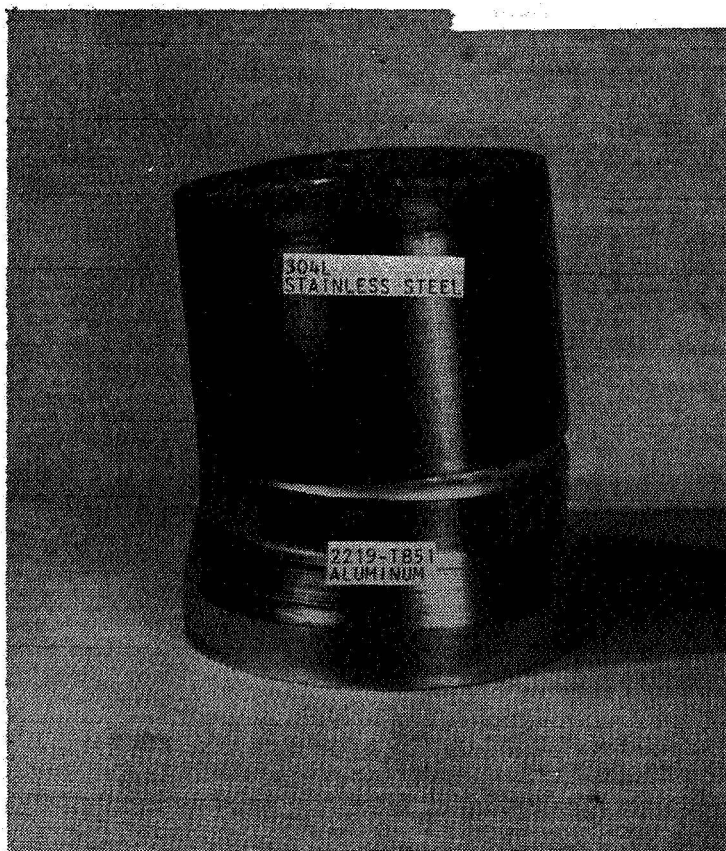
Explosive Welded Joint Burst Failure
